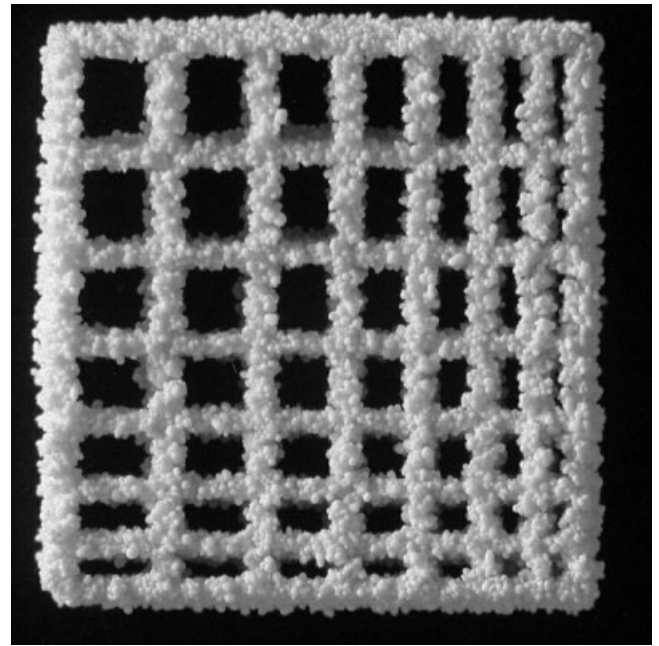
Sintered specimen of the compression test part with convex bottom. The diameter of the part is 11.5 mm.
